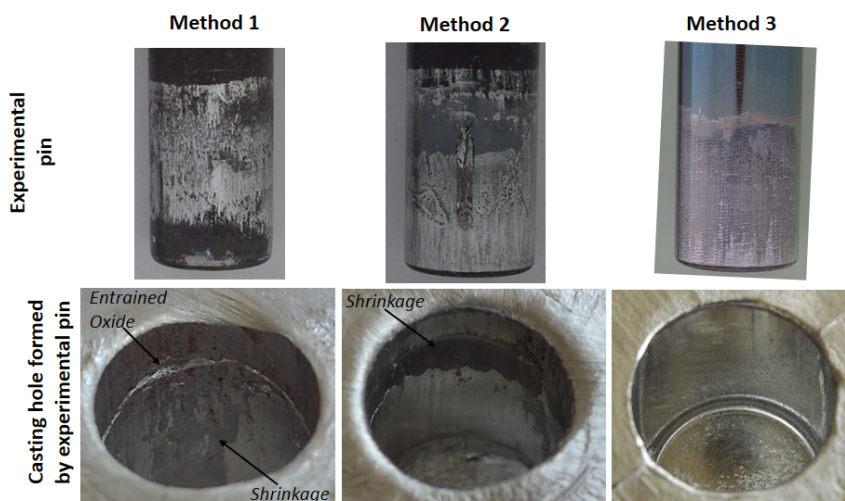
Appearance of casting holes formed by experimental pin and corresponding pins ejected from the casting
